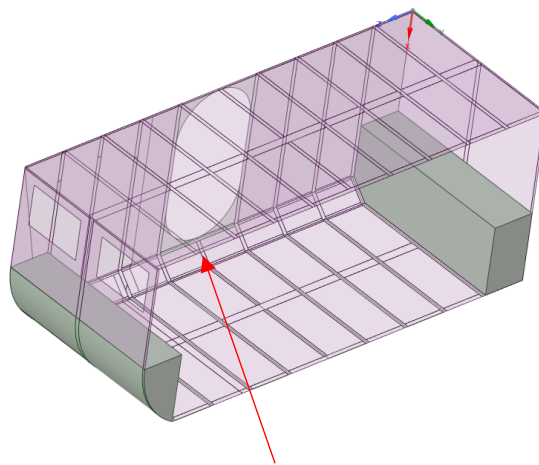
Mounting plates that connect the inflatable assembly to the MEV-I
